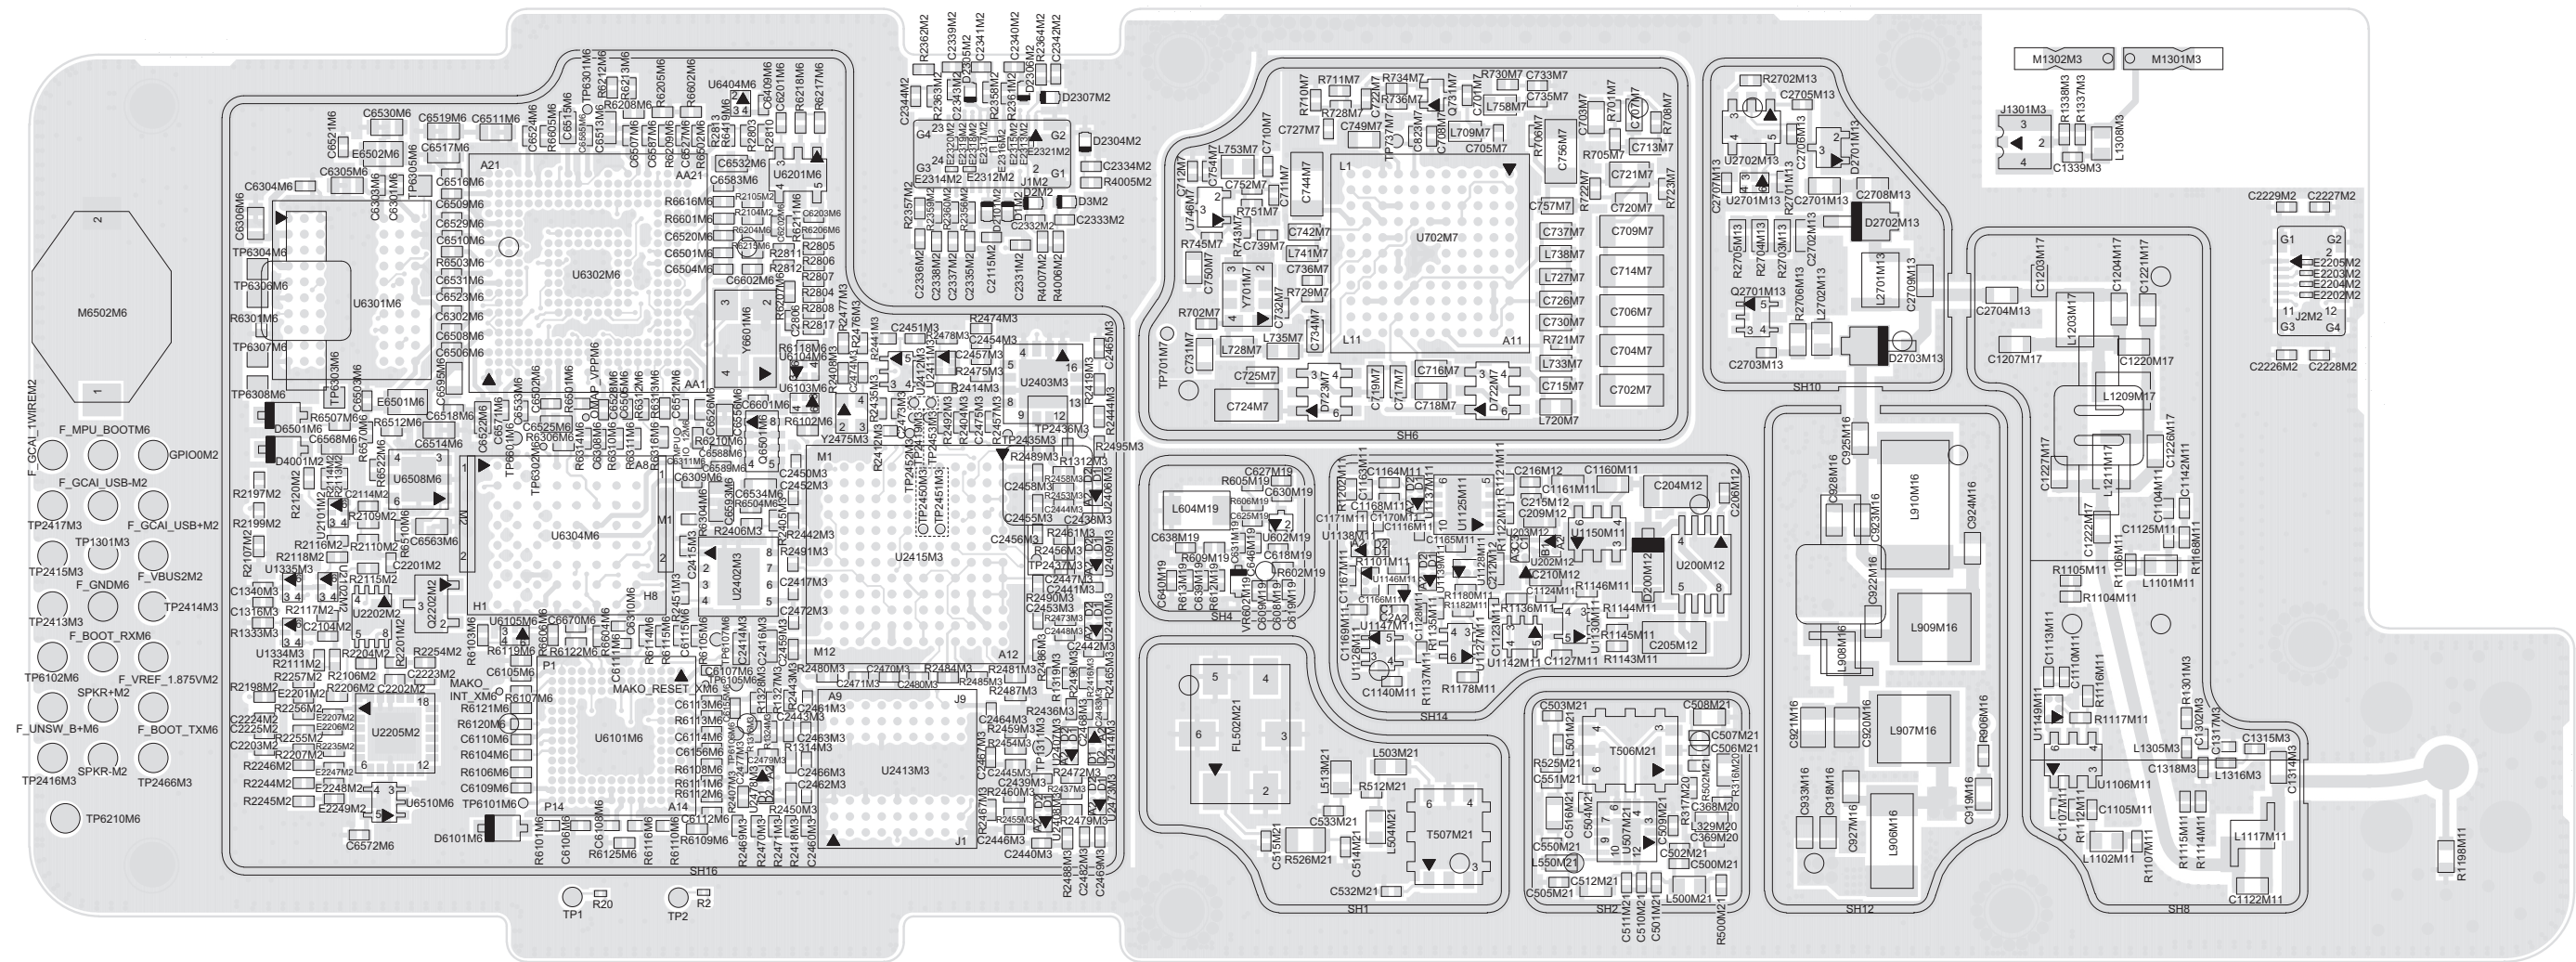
Transceiver (RF) Board Layout – Top Side
